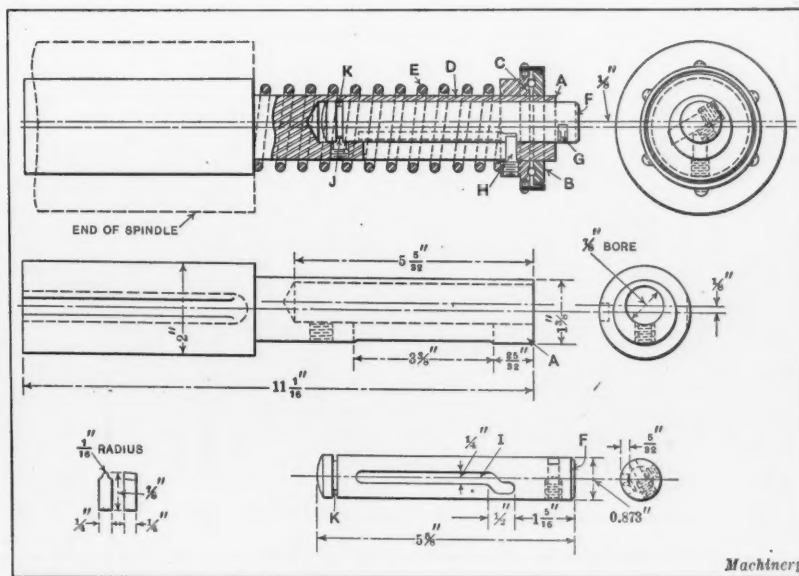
Tool for cutting Recess in the Bore of Sleeve shown in Fig. 8
